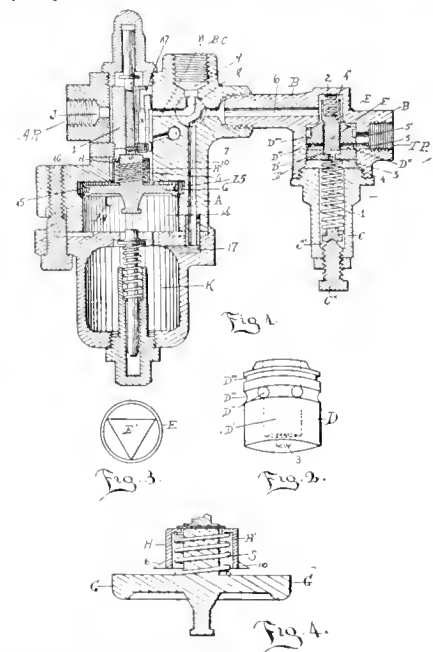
is bottom view of the valve. Fig. 4 is a sectional view of my improved triple-valve piston.
